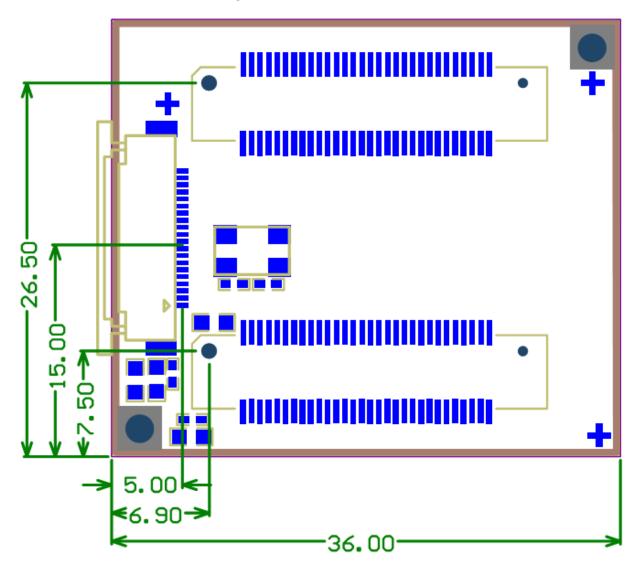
Mechanical outline and Bottom Connectors (top view)
